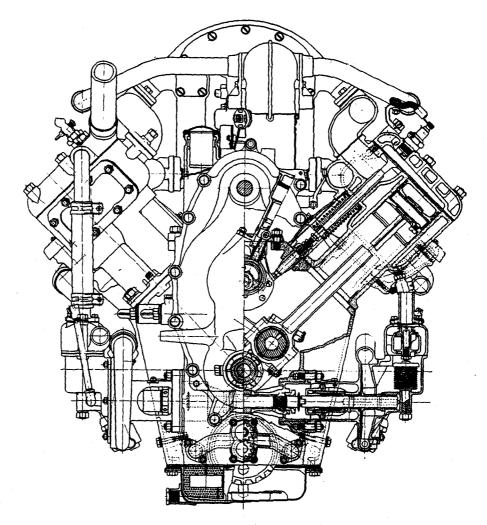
Front View of Type 61 Engine with One Half Sectioned
